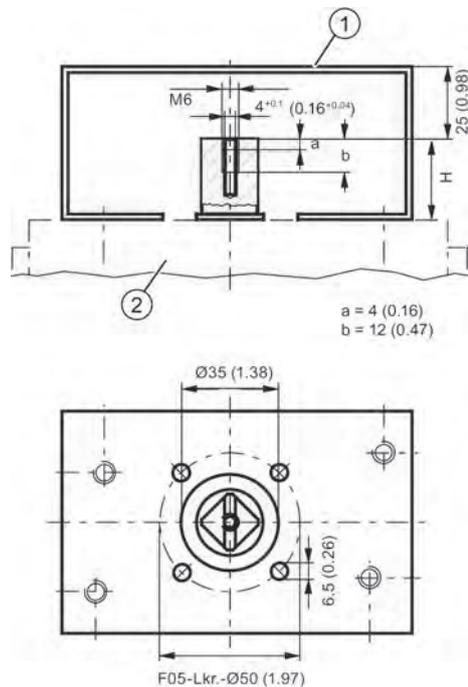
Positioner with mounting bracket fitted on rotary actuator
